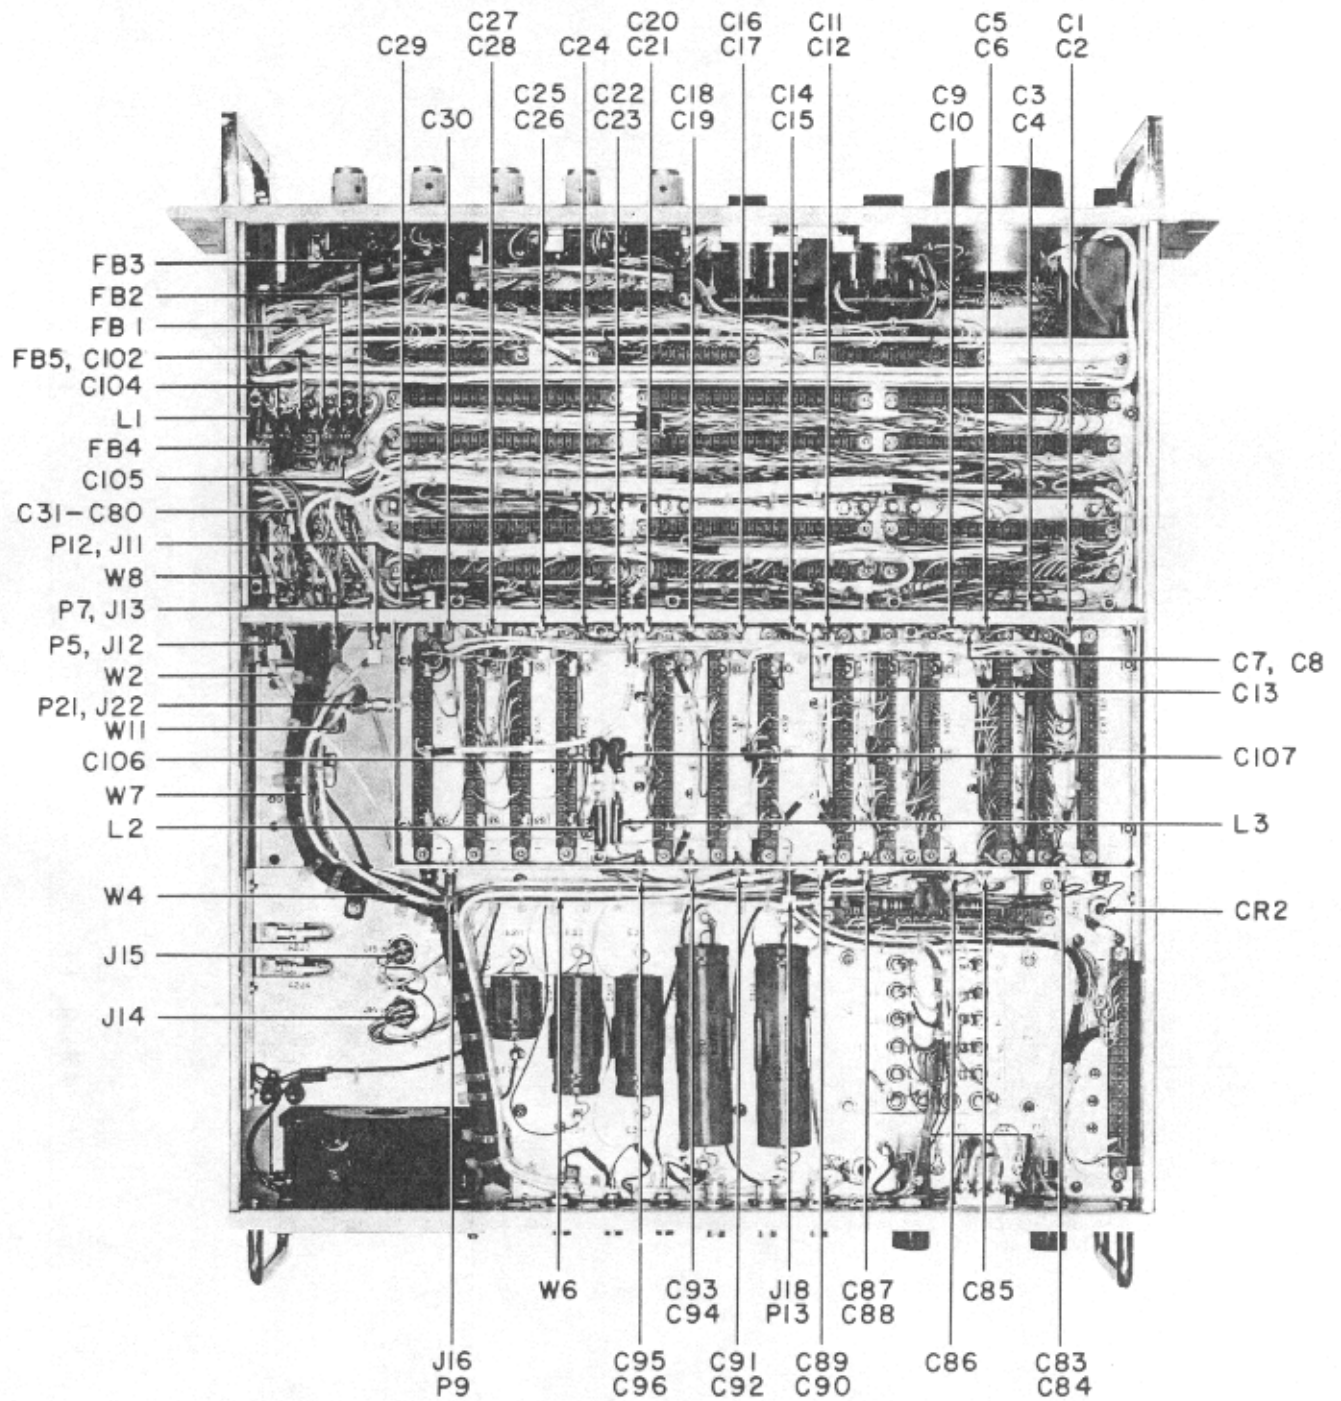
Type WJ-8888 Receiver, Bottom View, Location of Components
